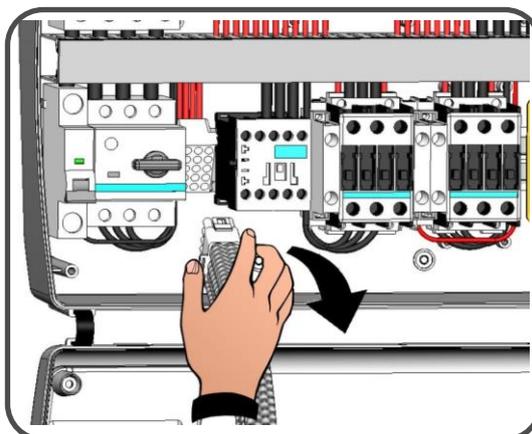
Apply pressure to the sides of each individual hinge to remove it from its seat and completely remove the front piece.
